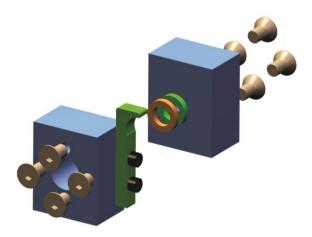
Exploded View of the Knee structural replacement assembly
